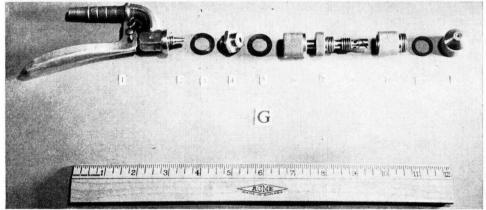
Unit "G" nozzle assembly. (1) Nozzle cap, (2) Adjustable nozzle, (3) Leather washer, (4) Outlet valve body, (5) Leather washer, (6) Trigger-operated valve pin, (7) Trigger.
